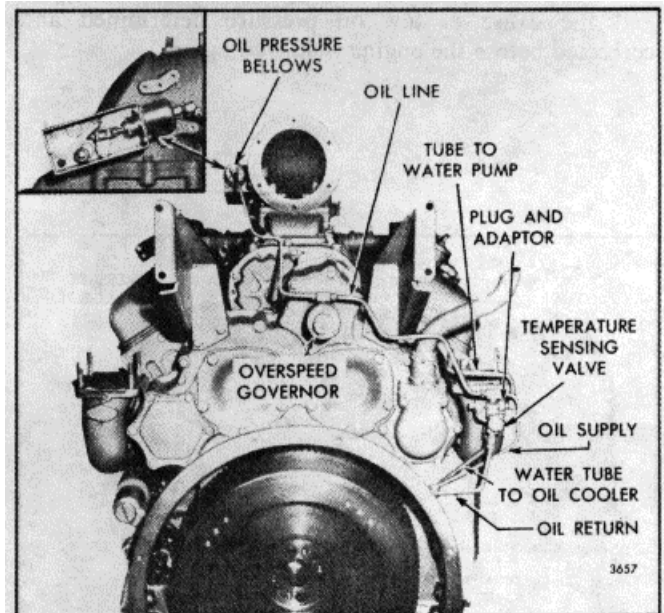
Automatic Mechanical Shutdown System Mounting
